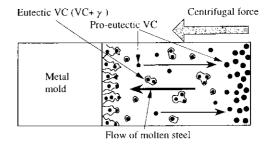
Segregation mechanism of V carbide in inner layer of a high C - high V steel roll during centrifugal casting
